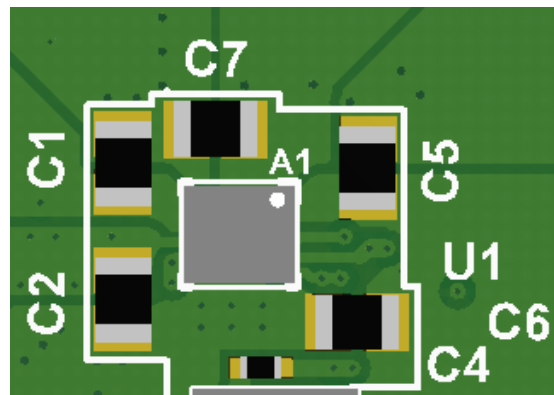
Die-Size Guide Box With Pin 1 Position Example
